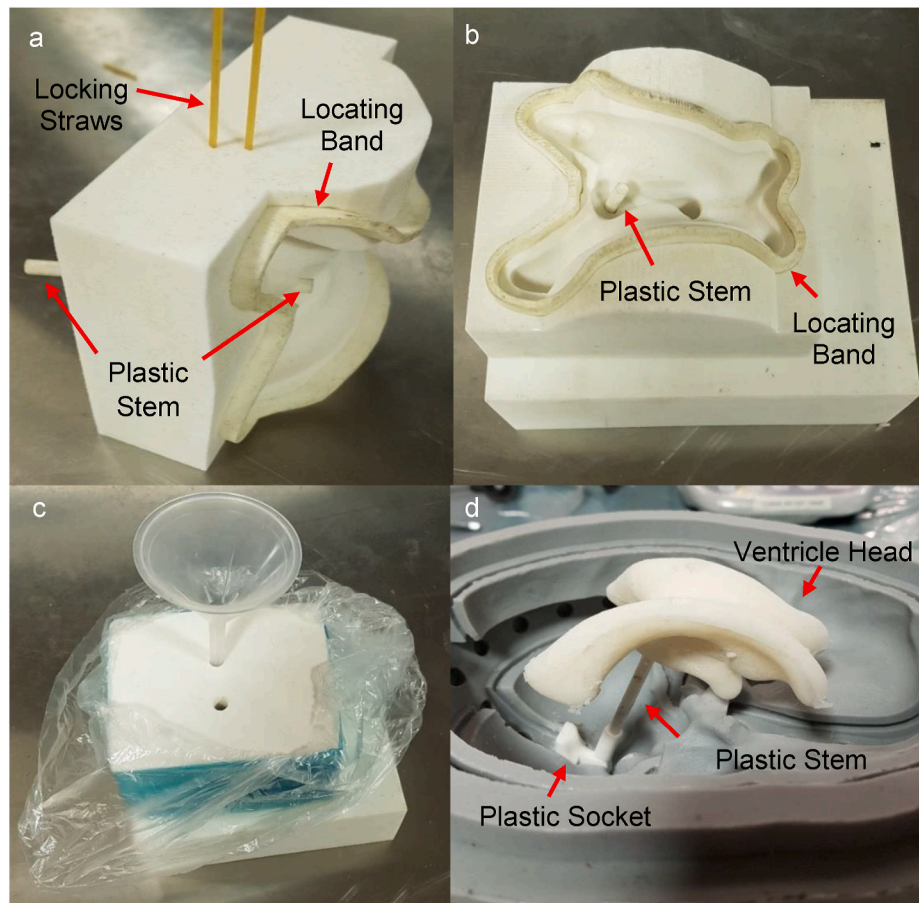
Ice ventricle insert mould. a) bottom section of ventricle insert mould with DuraForm locating band and stem in place; b) top-down view of bottom section of ventricle insert mould; c) assembled mould on stand; d) ventricle cast in coconut oil for demonstration purposes and inserted into lower half of CBM.
